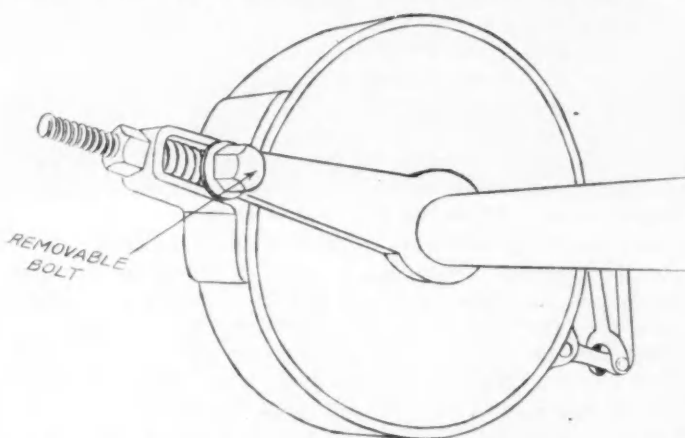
REPLACING THE STUD ON THE BRAKE MOUNTING OR TORQUE-ARM WOULD MAKE IT POSSIBLE TO REMOVE AND REPLACE THE EXTERNAL BRAKE BANDS WITHOUT HAVING TO REMOVE THE REAR WHEEL
